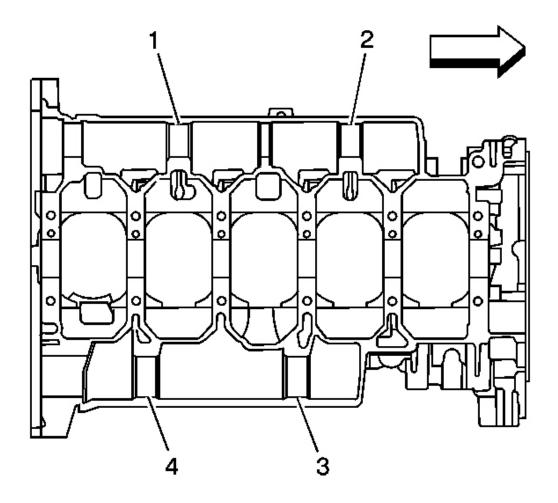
View Of Balance Shaft Journals Courtesy of GENERAL MOTORS CORP.
